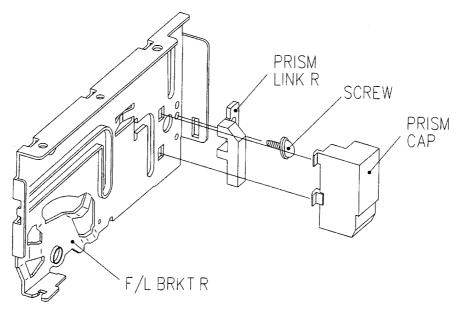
DISASSEMBLY OF THE F/L BRKT R
